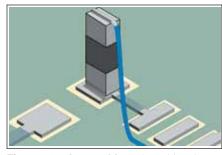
Acceptable Wire soldered to component end, lifted off pad.
